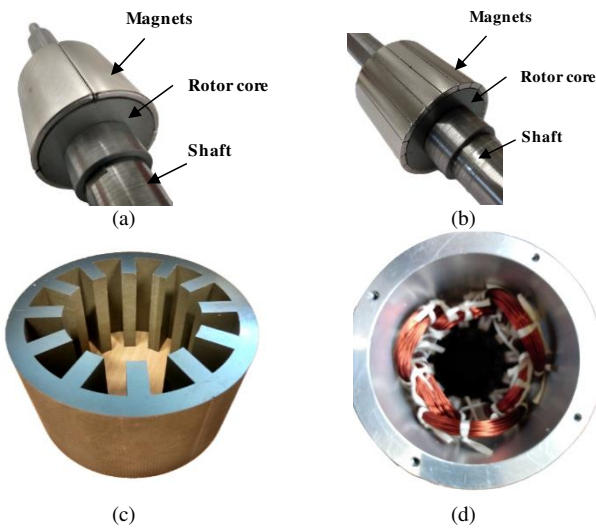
Prototypes of conventional SPM and SPM-V machines showing (a) rotor of conventional SPM machine with 4 poles, (b) rotor of SPM-V machine with 20 poles, (c) stator core with 12 slots and (d) complete assembly of stator core with winding and housing.
